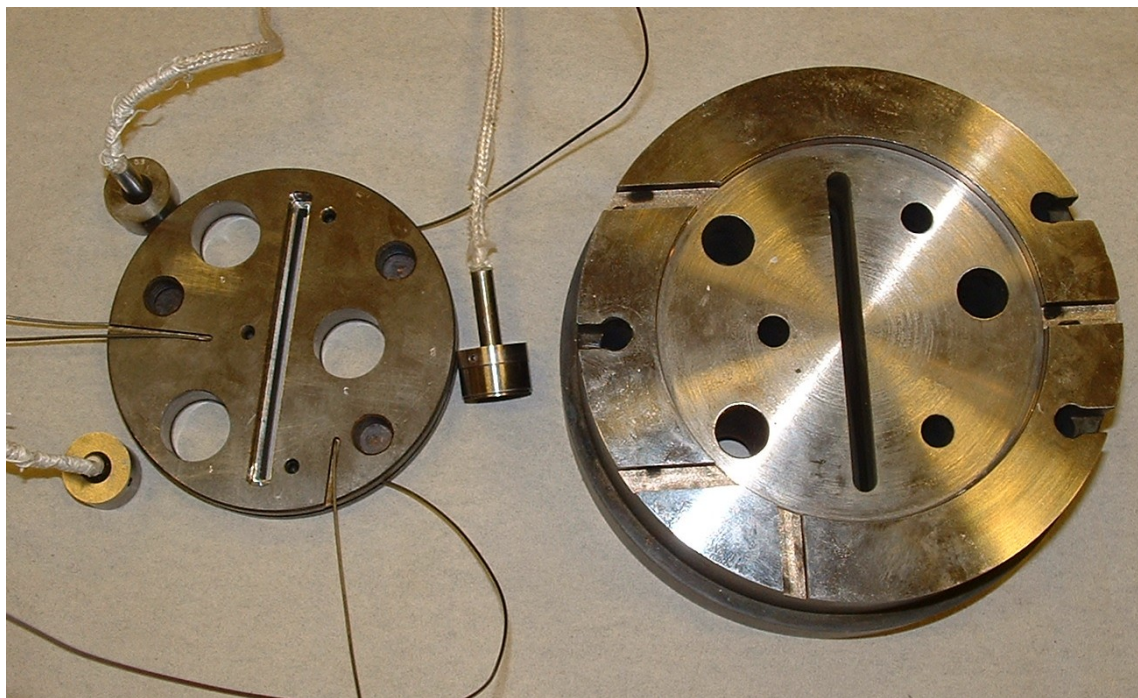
The extrusion die that was used in the last round of thin strip experiments. The die consisted of a top disc and die core (support) similar to the one used during rod extrusion with the complex die.
